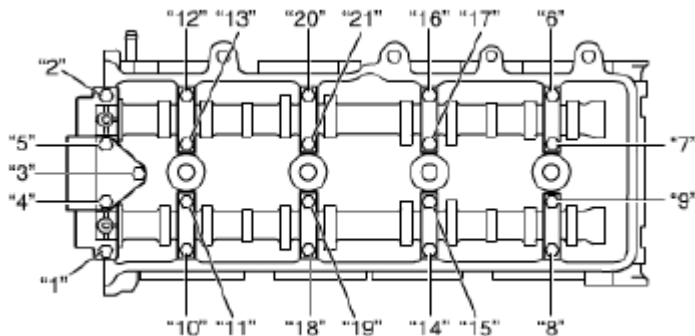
Identifying Camshaft Housing Bolts Sequence
